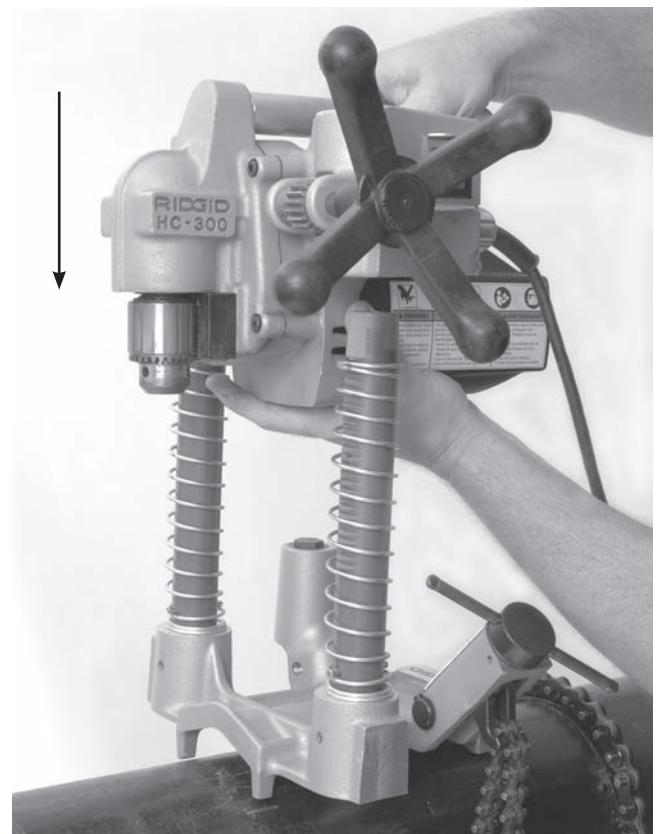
Attaching the HC-300 Motor Assembly to the Base Assembly
